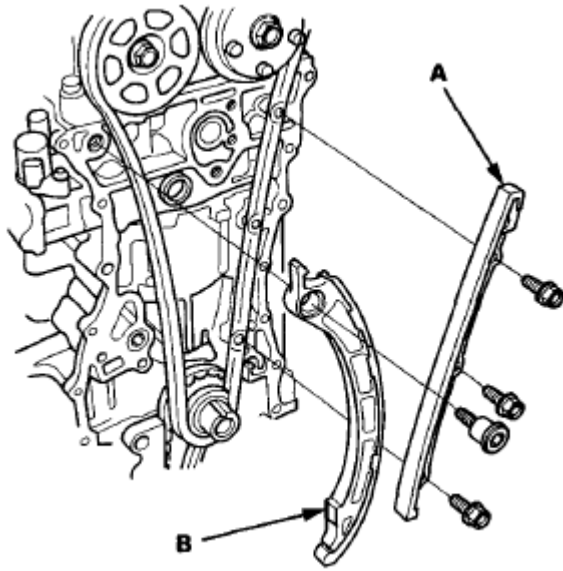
Identifying Cam Chain Guide And Tensioner Arm
